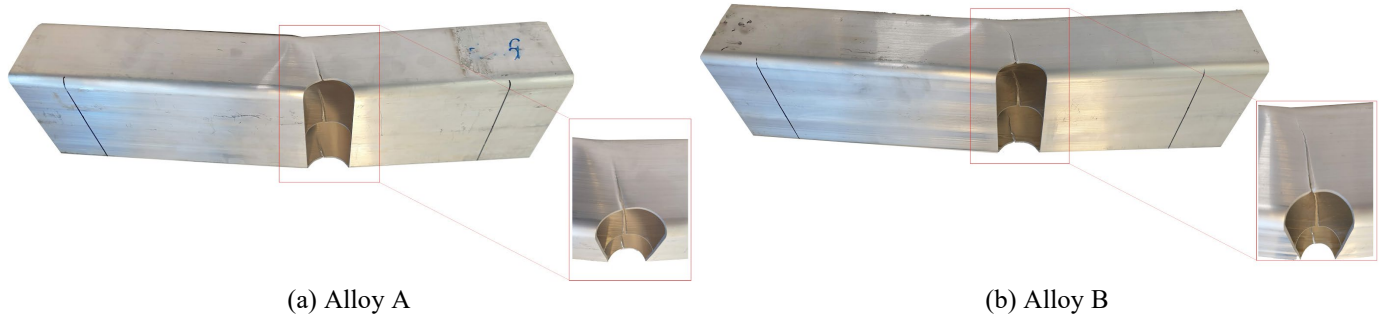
Images of fractured three-point bending specimens for (a) Alloy A and (b) Alloy B.
